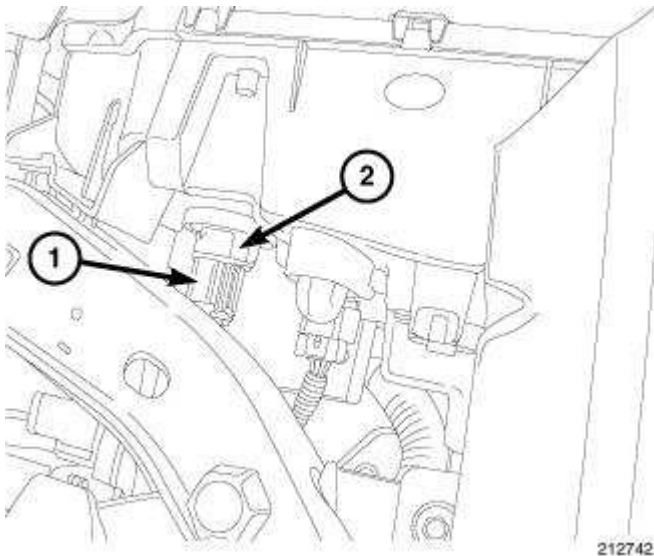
Removing/Installing Front Park And Turn Signal Lamp
